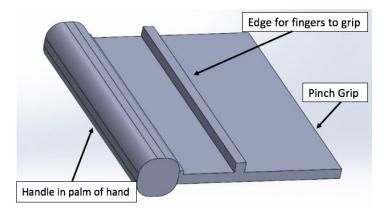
SolidWorks of the revised pinch grip handle piece of the final design.
